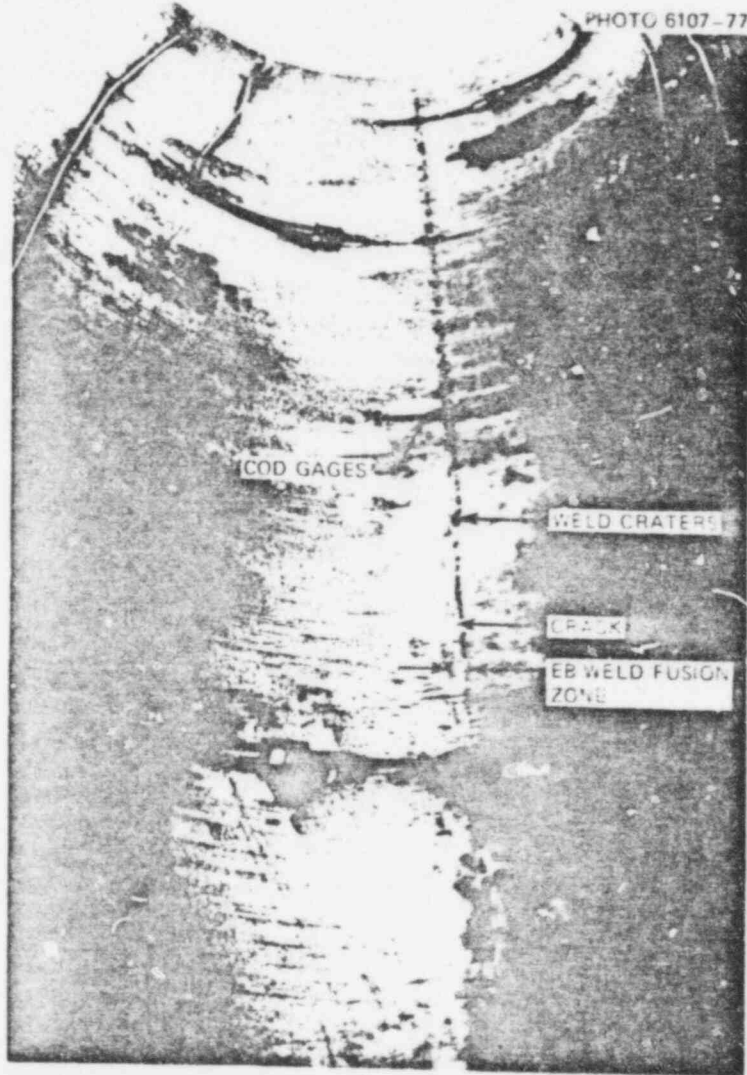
View of inner surface of TSV-2 following TSE-4, showing EB-weld flaw and COD gages. Gages buckled during experiment.
